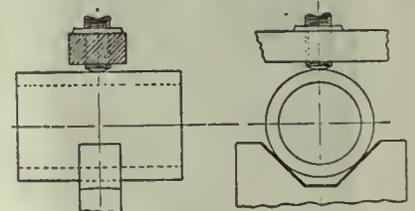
IMPROPER METHOD OF CLAMPING A BUSHING FOR TOOLING.
